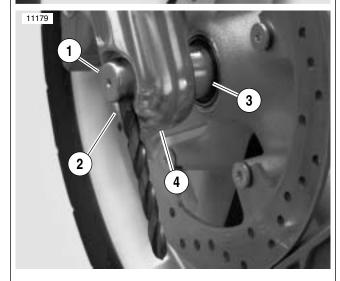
Caliper Mounting Bolts (typical) (VRSCR shown)
